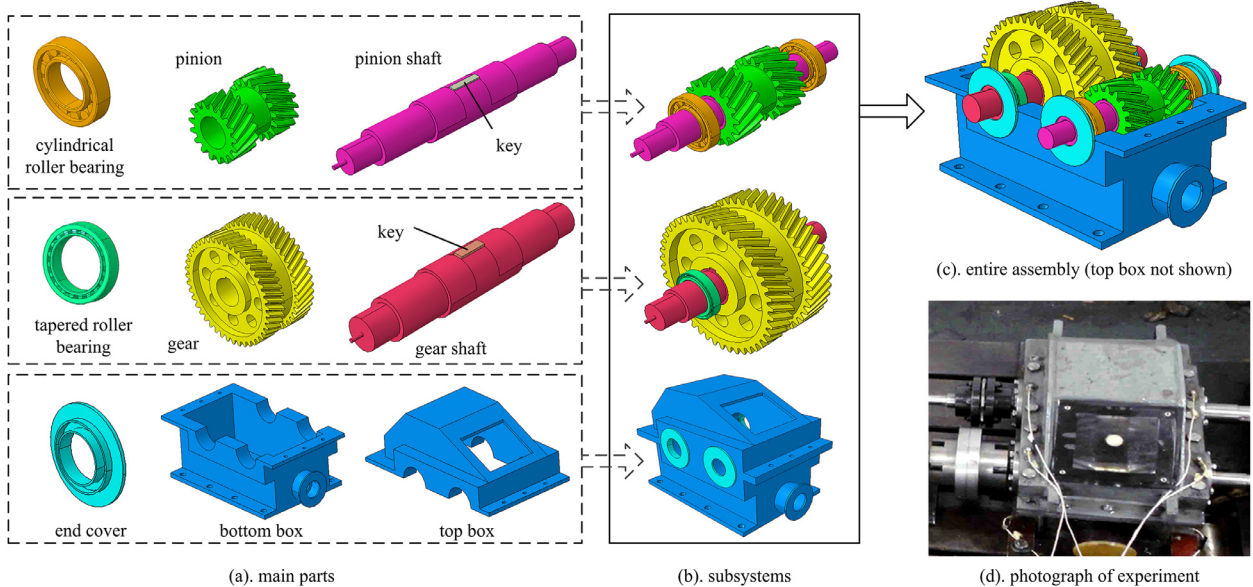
Assembly relationship of a typical double-helical gear reduction unit: (a) main parts; (b) subsystems; (c) entire assembly (top box not shown); (d) photograph of experiment.
